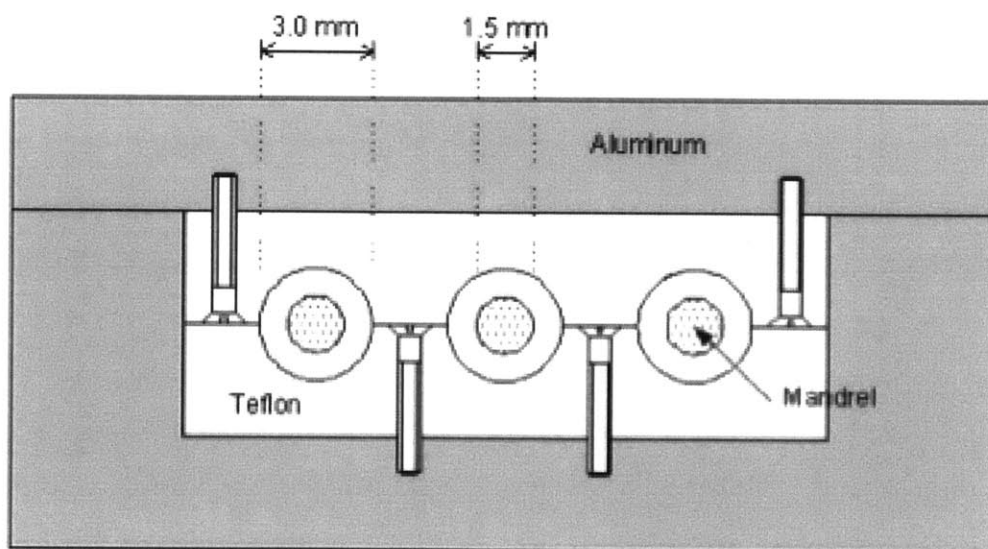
Teflon and aluminum mold (side view) with inserted mandrels
